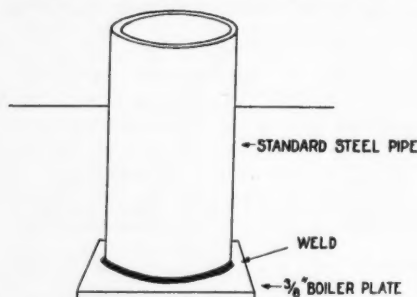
Carburizing Pot made from steel pipe welded to a base of boiler plate.
